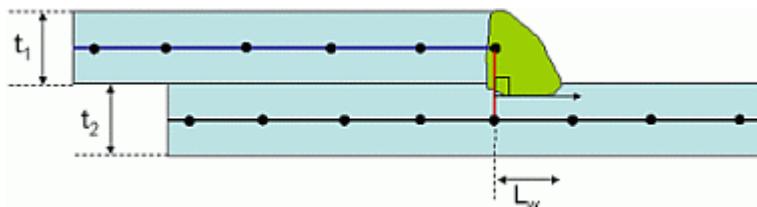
Overlap weld modeling—two-element approach
